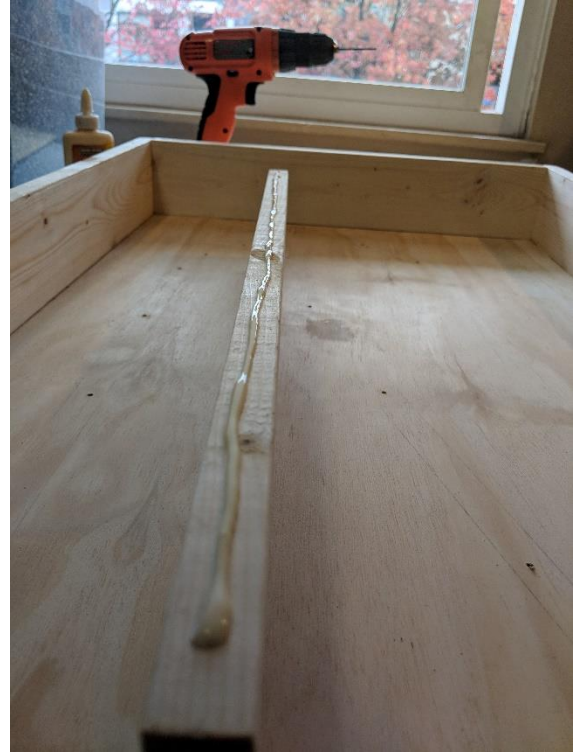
Gluing the wood before screwing makes the machine much more sturdy and helps seal wood seams.
